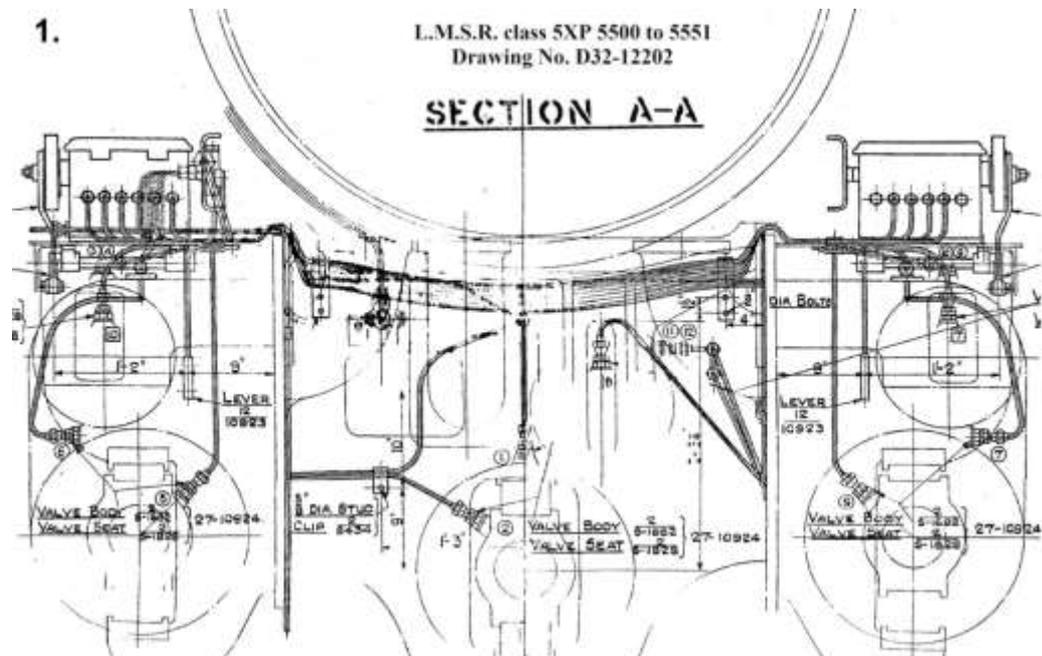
Section through the frames showing the cylinder oil mechanical lubricator on the left and the axle box mechanical lubricator on the right - looking forwards to the back of the cylinders. (From LMS Drawing D32-12202 - locomotives 5500 to 5551.)
